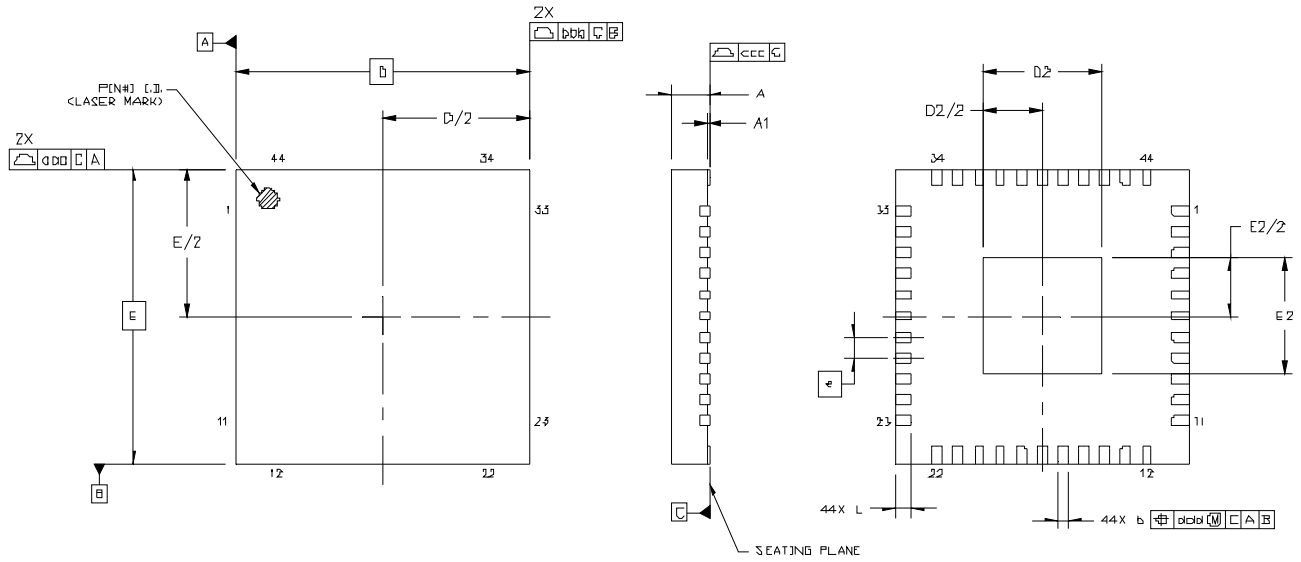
Si53305 7x7 mm 44-QFN Package Diagram
